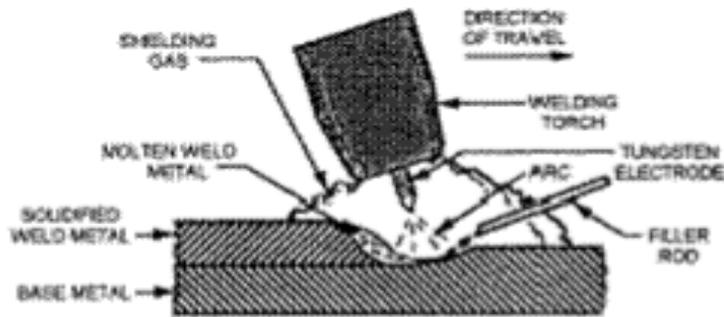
Gas Tungsten Arc Welding (GTAW)
